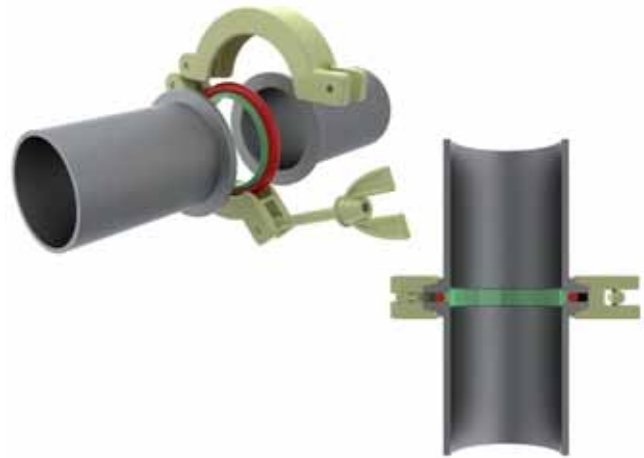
ISO-KF connection with centering ring and clamping ring
